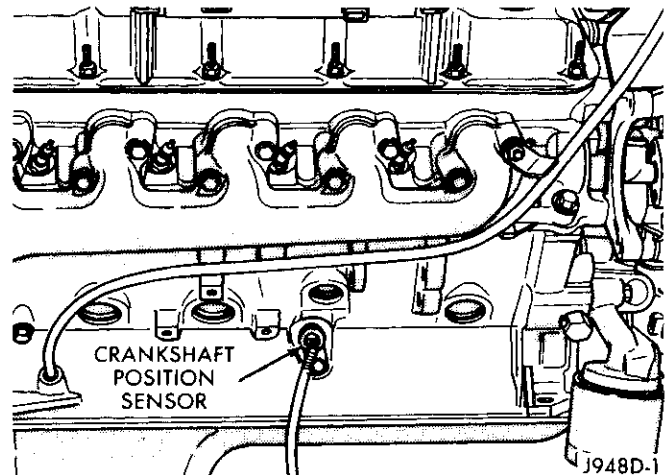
Crankshaft Position Sensor—8.0L V-10 Engine—Typical
